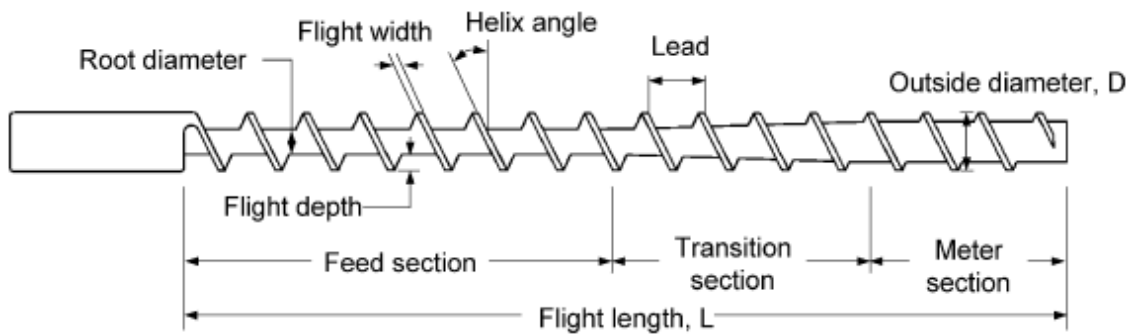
Typical geometries of a screw for single-screw extruder. ^[23]
